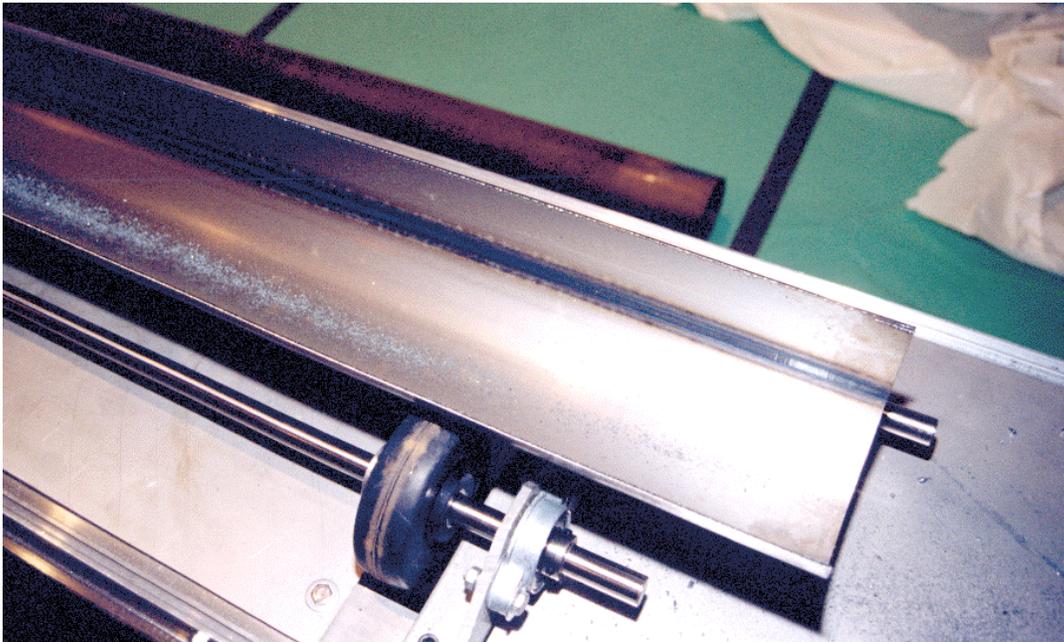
Close-Up of a Laser-Cut Fuel Storage Tube Section
